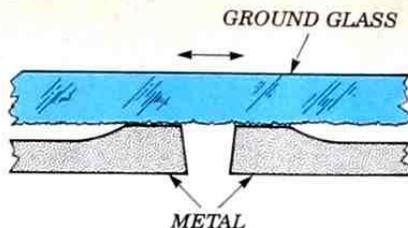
The liquid-lens holder is completed by grinding away the protruding edges of the burrs on both surfaces after making the hole illustrated in Figure 6.
